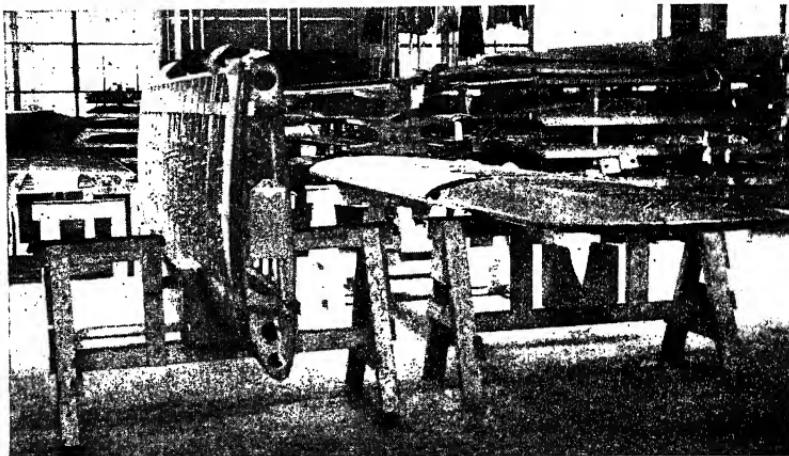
Special horses for handling wing sections at San Diego. (*Official U.S. Navy Photograph.*)
